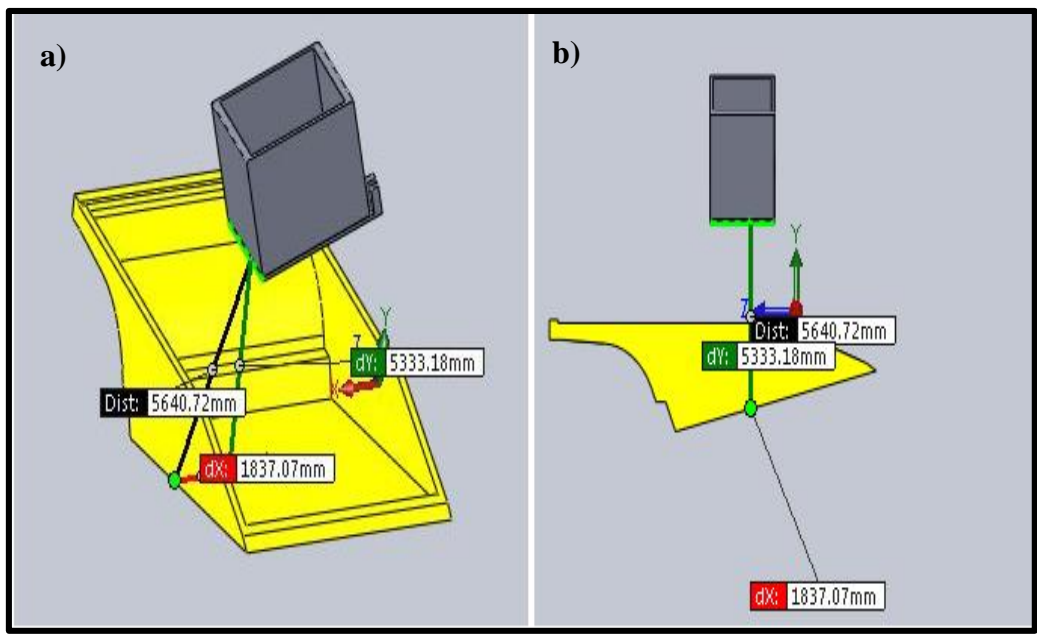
Truck Body and Shovel Dipper CAD Assembly for $H_t = 5.33$ m (5333 mm):
